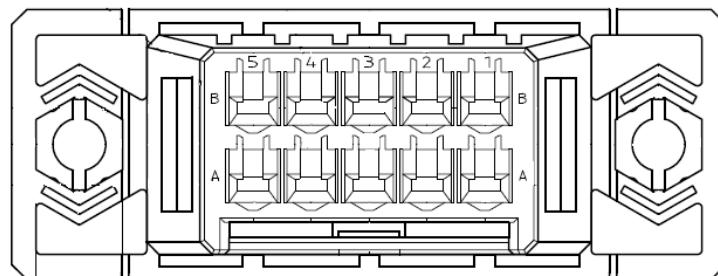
HSCB Control Panel Connectors Layout Drawing
